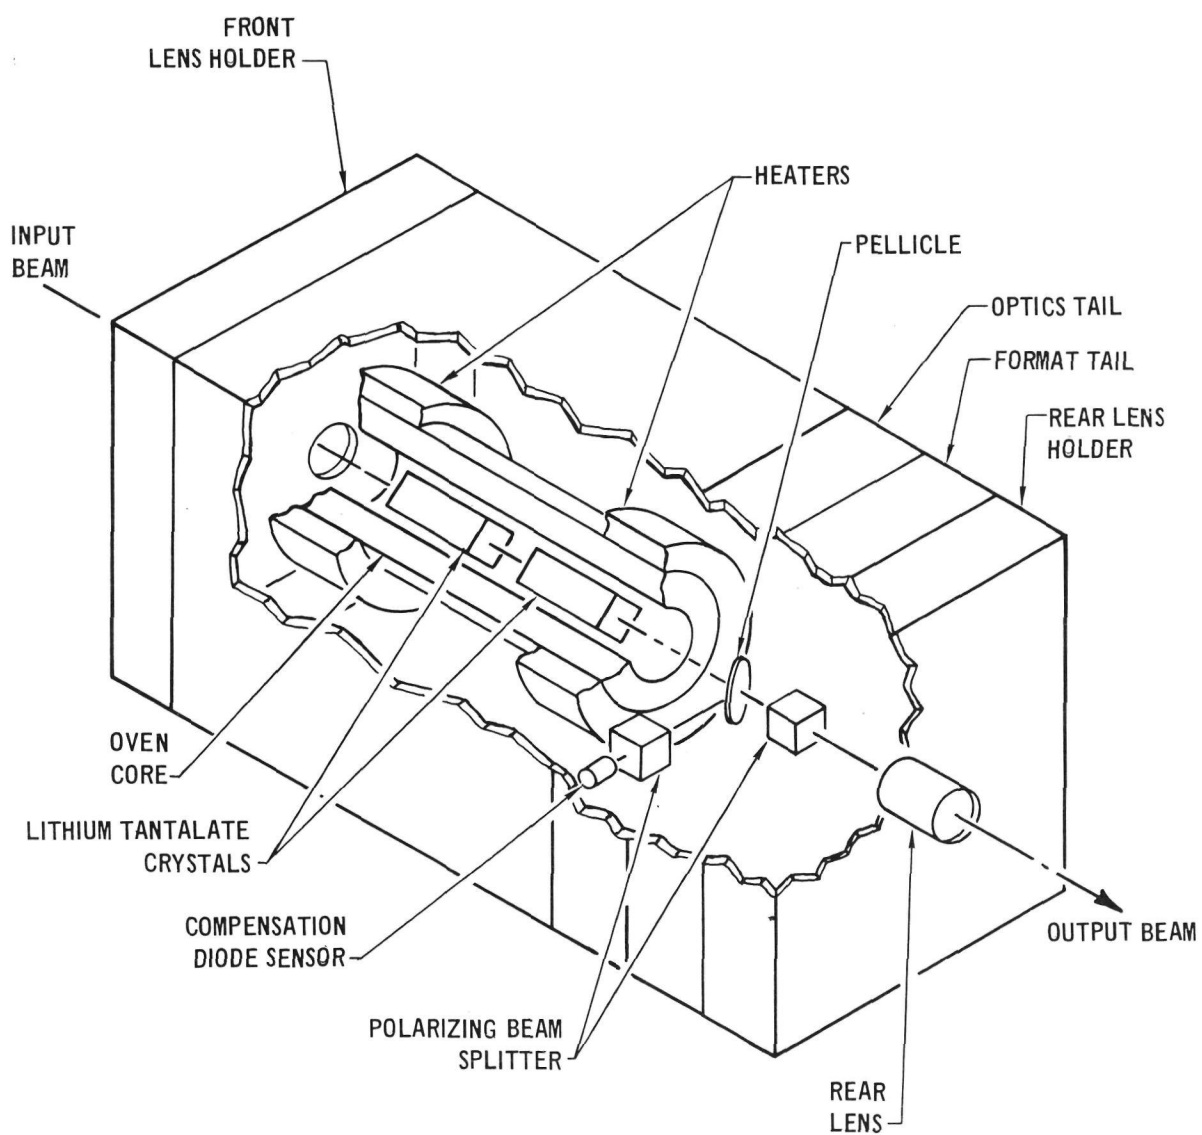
MODULATOR ASSEMBLY CUTAWAY VIEW
